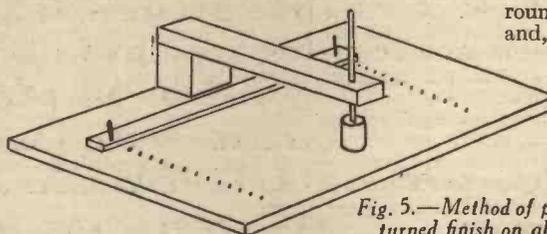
Method of producing an engine-turned finish on aluminium panels.
